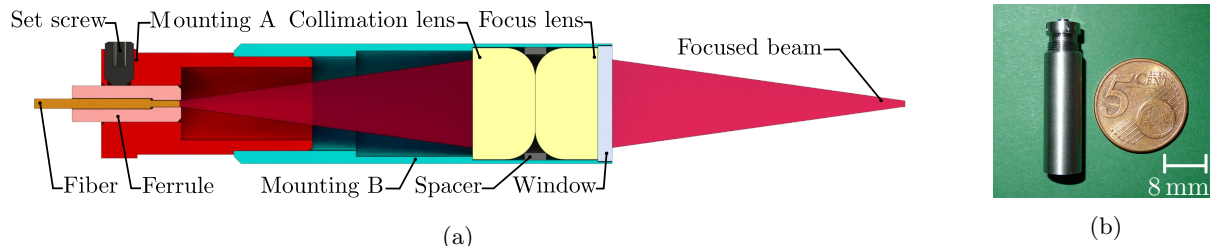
Design and prototype of proposed focusing unit: (a) Schematic CAD-drawing of the assembly composed of threaded mountings A and B, beam shaping and fiber optics, and protective window. (b) Prototype assembled and manufactured in stainless steel.
